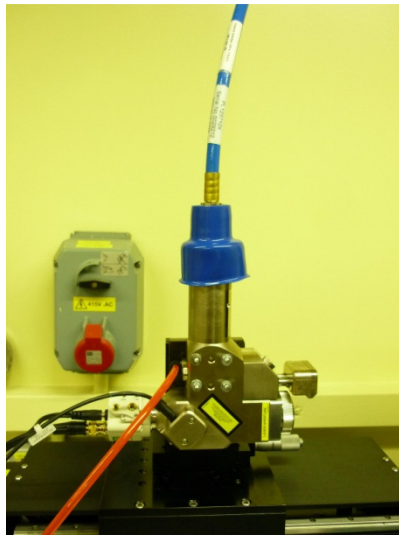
Pulsed Nd:YAG inner welding unit arrangement
